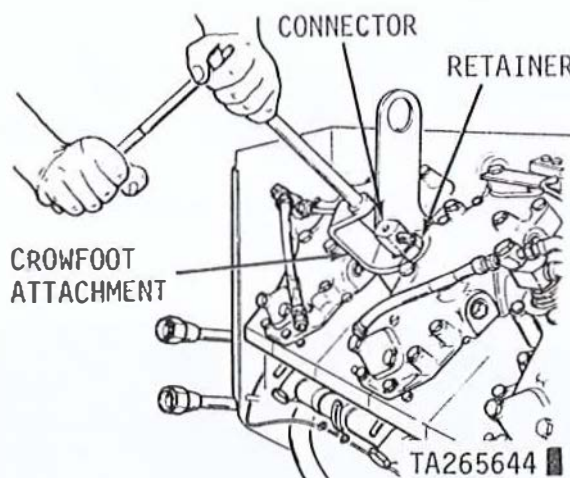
Loosening fuel injector nozzle and holder assembly using crowfoot attachment.
